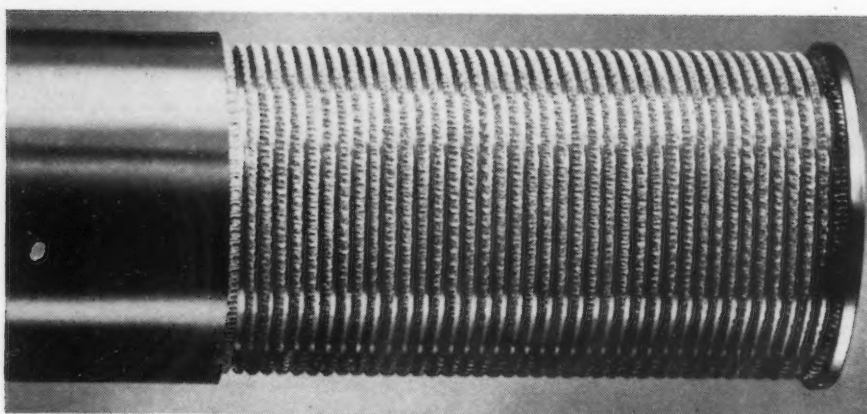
Surface may be undercut and grooved followed by roughening with a preparing tool.
